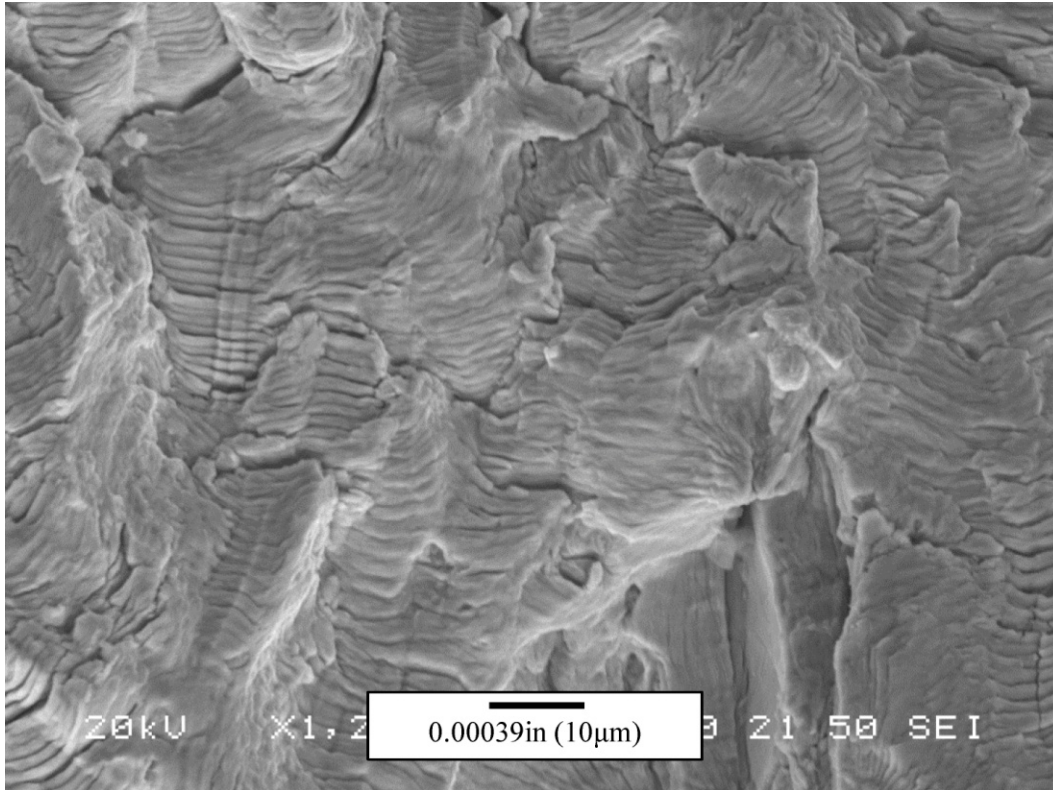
Sample fracture surfaces of specimens tested at 600°F (315°C) as viewed under the SEM.
